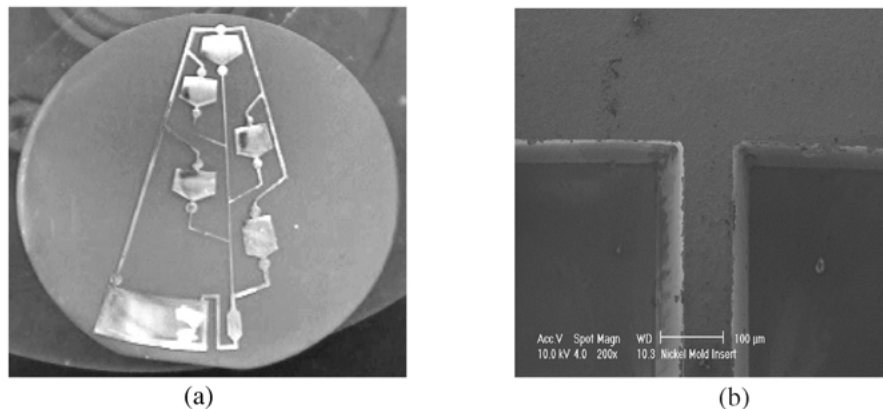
(a) Photo of a nickel mold insert, (b) SEM photo showing positive draft angle (top view).
